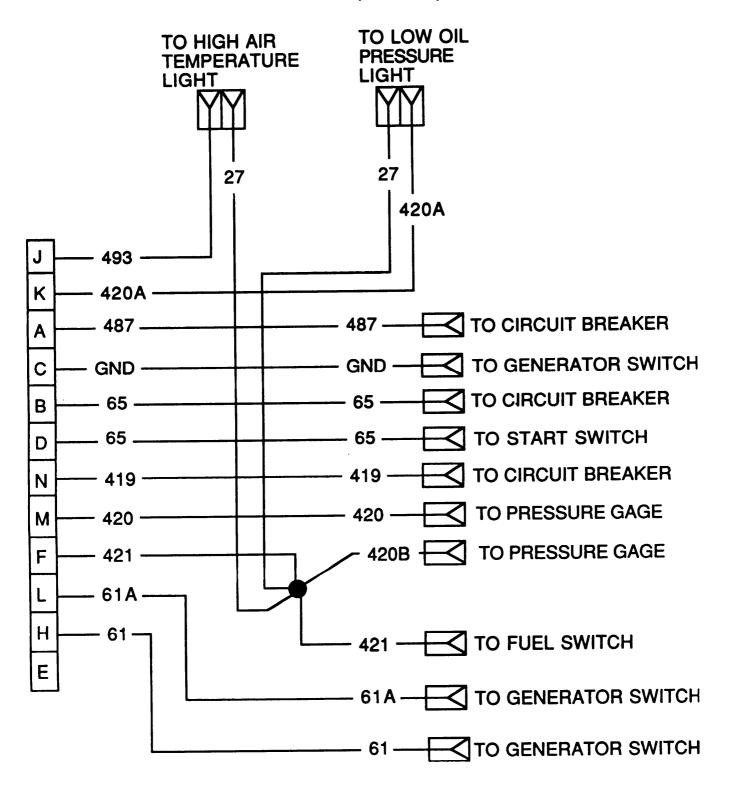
Auxiliary Power Unit Control Box Wiring Harness Assembly (11672409)
